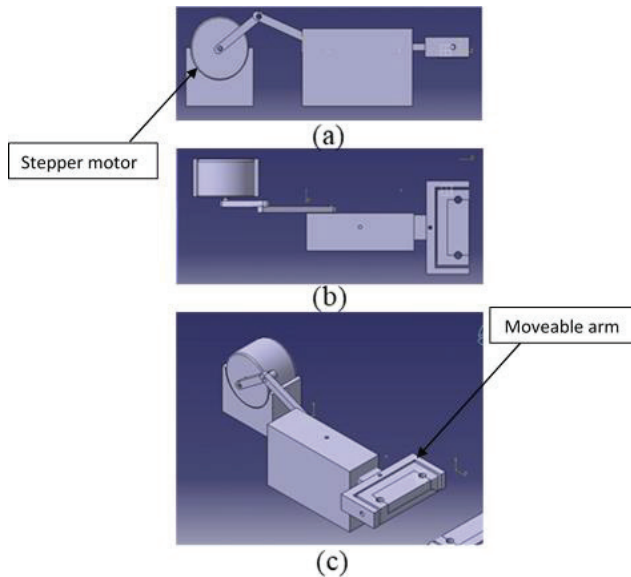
3D CAD of movable end arm attached with stepper motor: (a) side view, (b) top view and (c) isometric view
